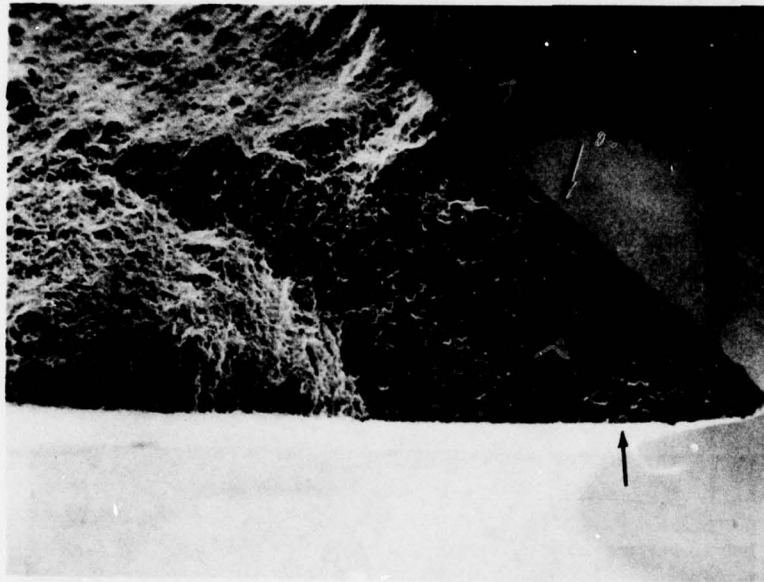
Fracture Surface of 650°C Dwell
